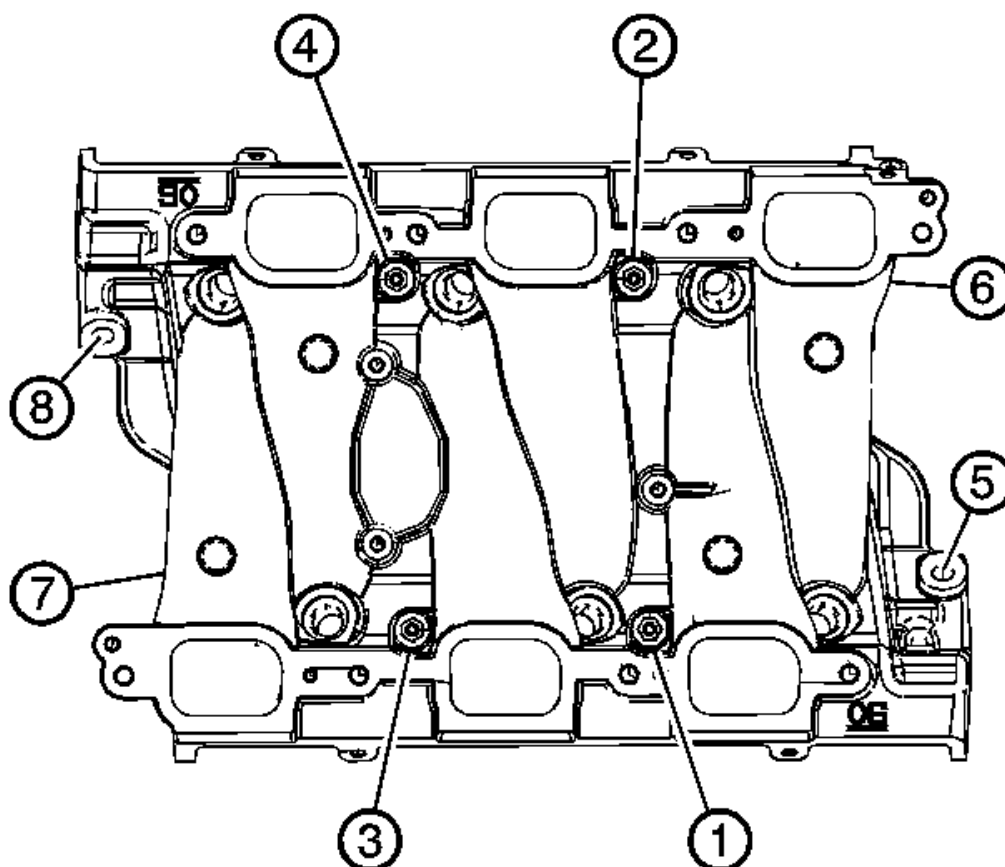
Identifying Lower Intake Manifold Tightening Sequence
